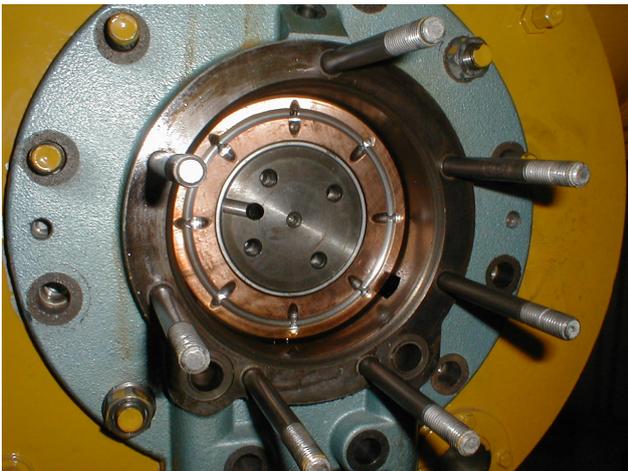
Standard thrust bearing; refer also Figure 38, Page 25
